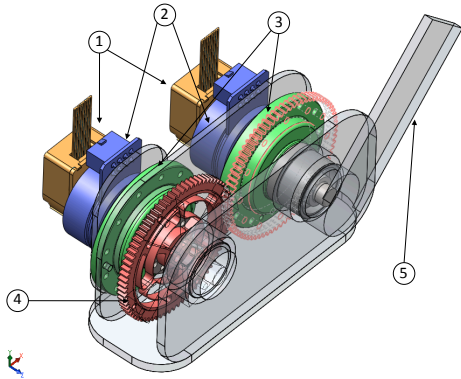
3D CAD drawing of the VIDA system. 1: encoders, 2: flat motors, 3: HD gears, 4: custom torsion spring, 5: output link. PR components are on the right side, IR components are on the left. Motion is transmitted through a 1:1 transmission ratio gear connecting the the series elastic element to the CS of the differential HD. The case is shown in transparency, with overall dimensions of  $150 \times 85 \times 100$  mm (along the  $x$ ,  $y$  and  $z$  axes, respectively).
